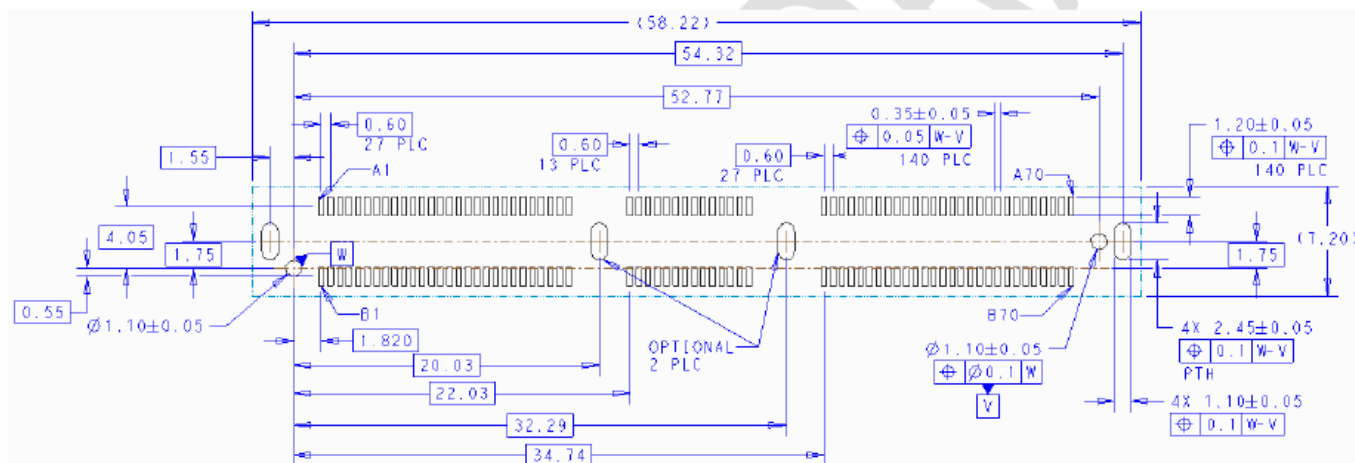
PCB Layout for GenZ VT 4C Unshielded
